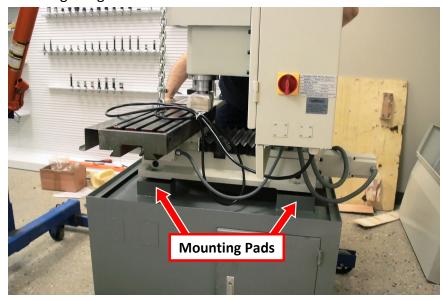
Machine lowered on to the mounting pads on the machine stand.
